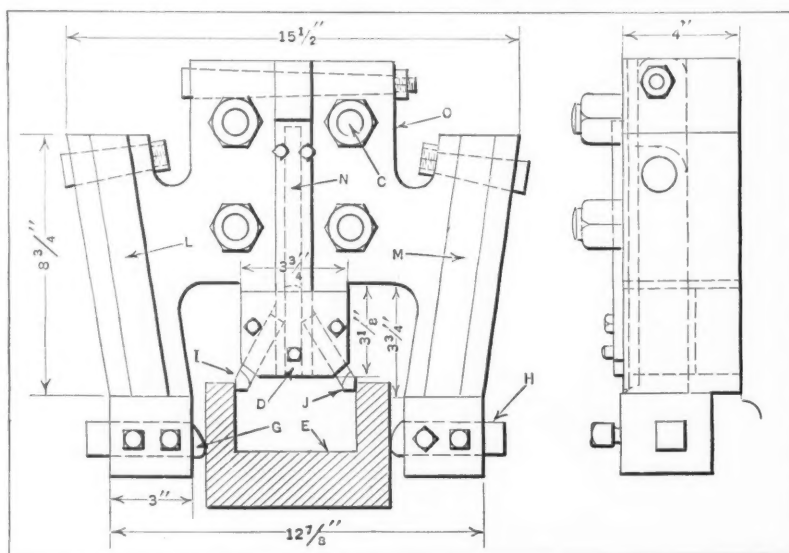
One of the Tool-heads Used in Set-up Shown in Fig. 1
